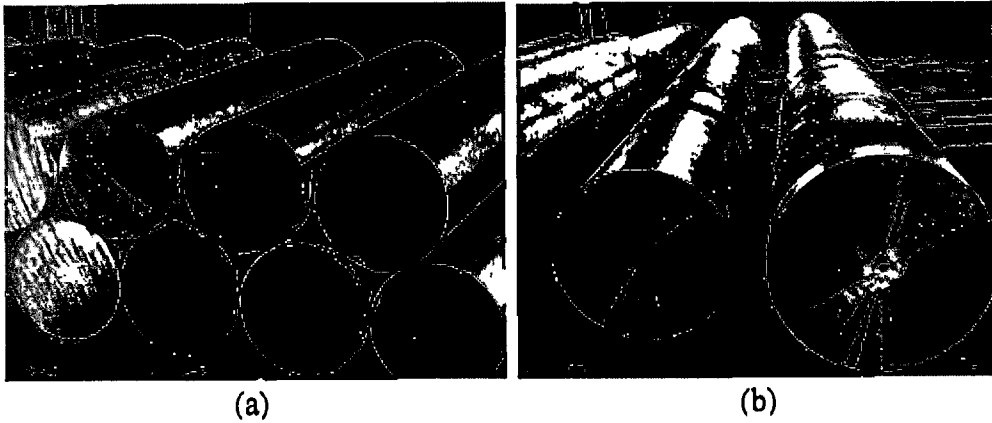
Materials use to produce the chips sample. (a) AA6061 (b) AA7075
